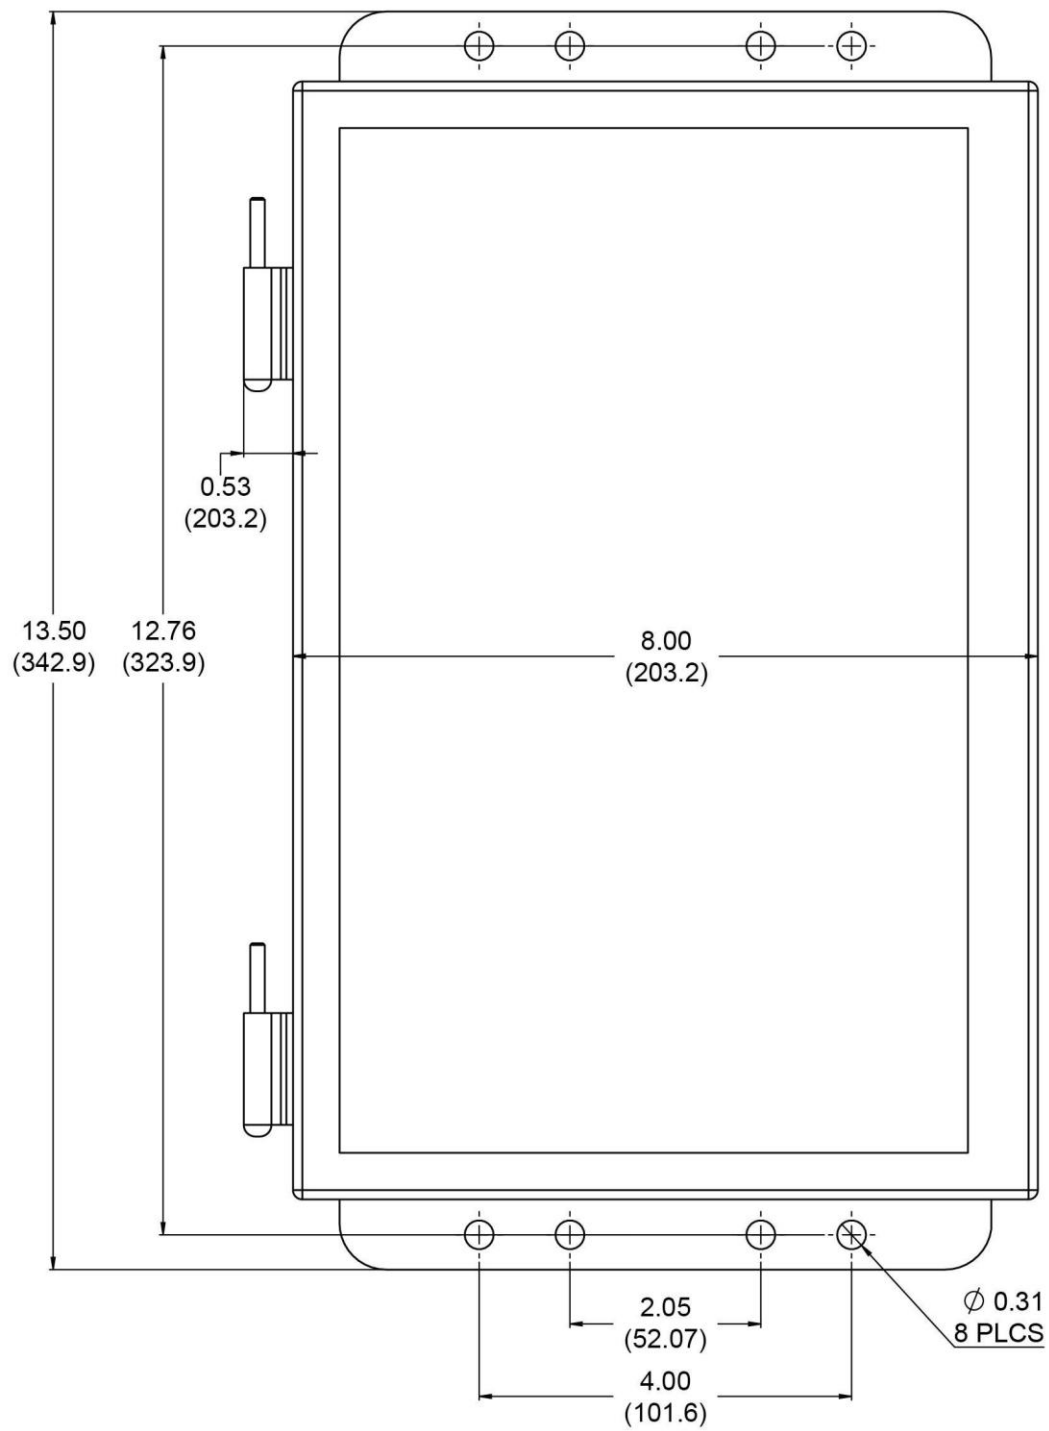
Shadow 10 Control Box Dimensions (door removed)
